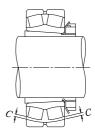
Clearance Measurement of Spherical Roller Bearing
